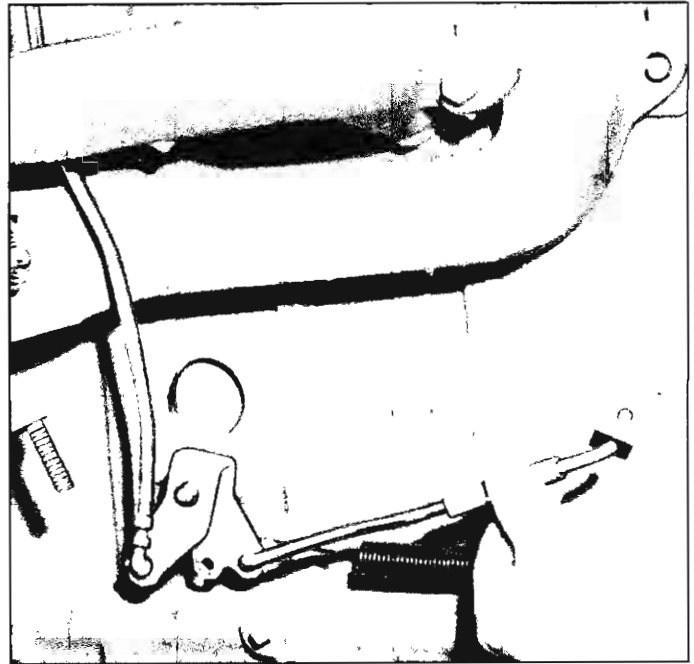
Adjusting Throttle Linkage—Six Cylinder Carburetor
